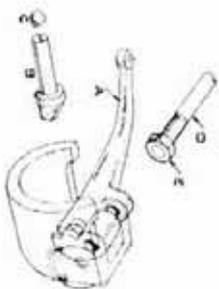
CLUTCH-OPERATING MECHANISM USED ON H.P.-TYPE GEARBOX. (A) Operating lever for clutch. (B) Short push-rod. (C) Steel ball. (D) Hinge pin. (E) Lock-nut for pin.
